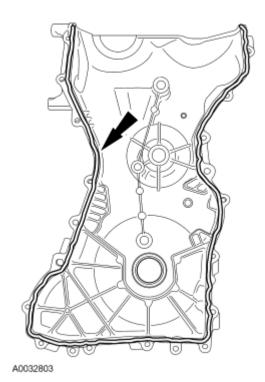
Locating Silicone Gasket Courtesy of FORD MOTOR CO.
